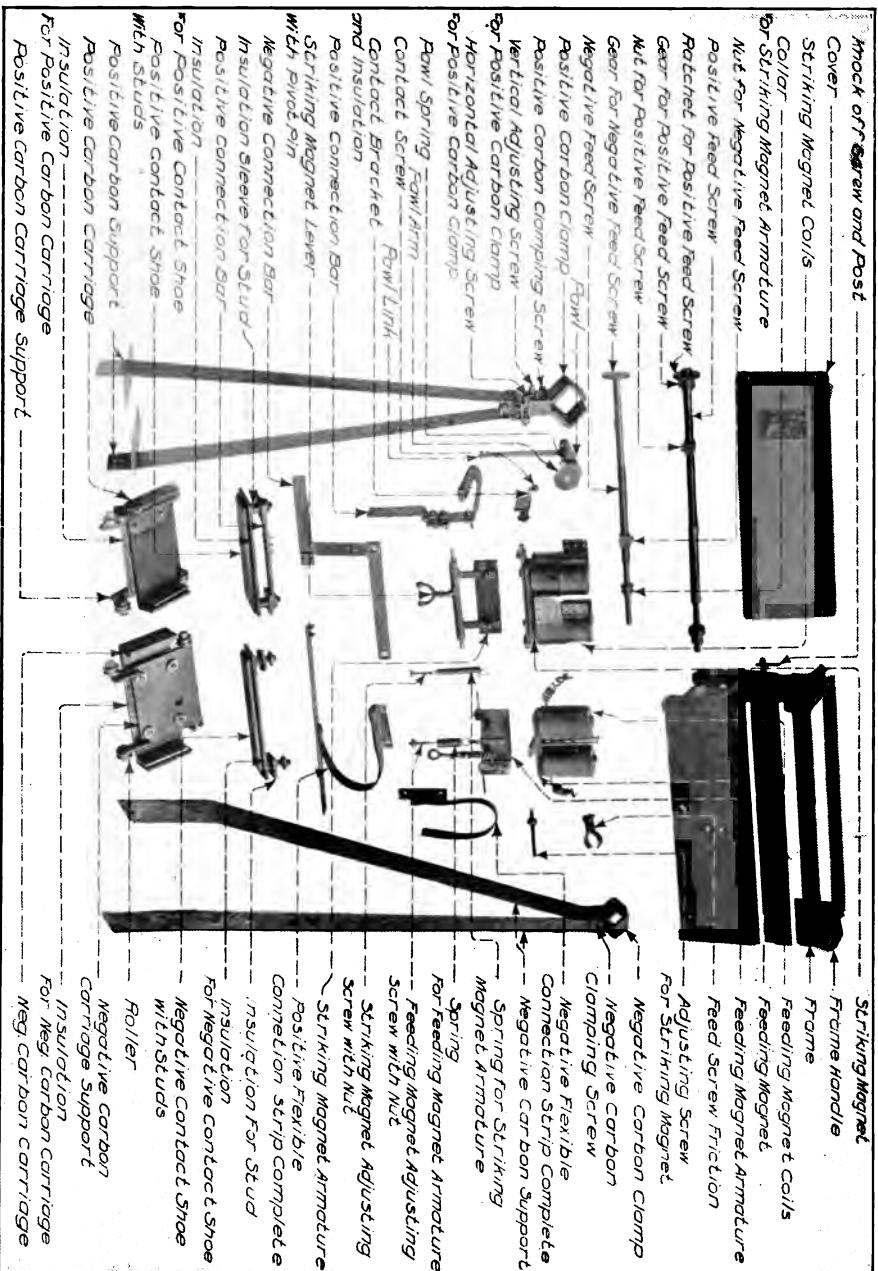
Parts of 60-Inch Lamp Mechanism.
